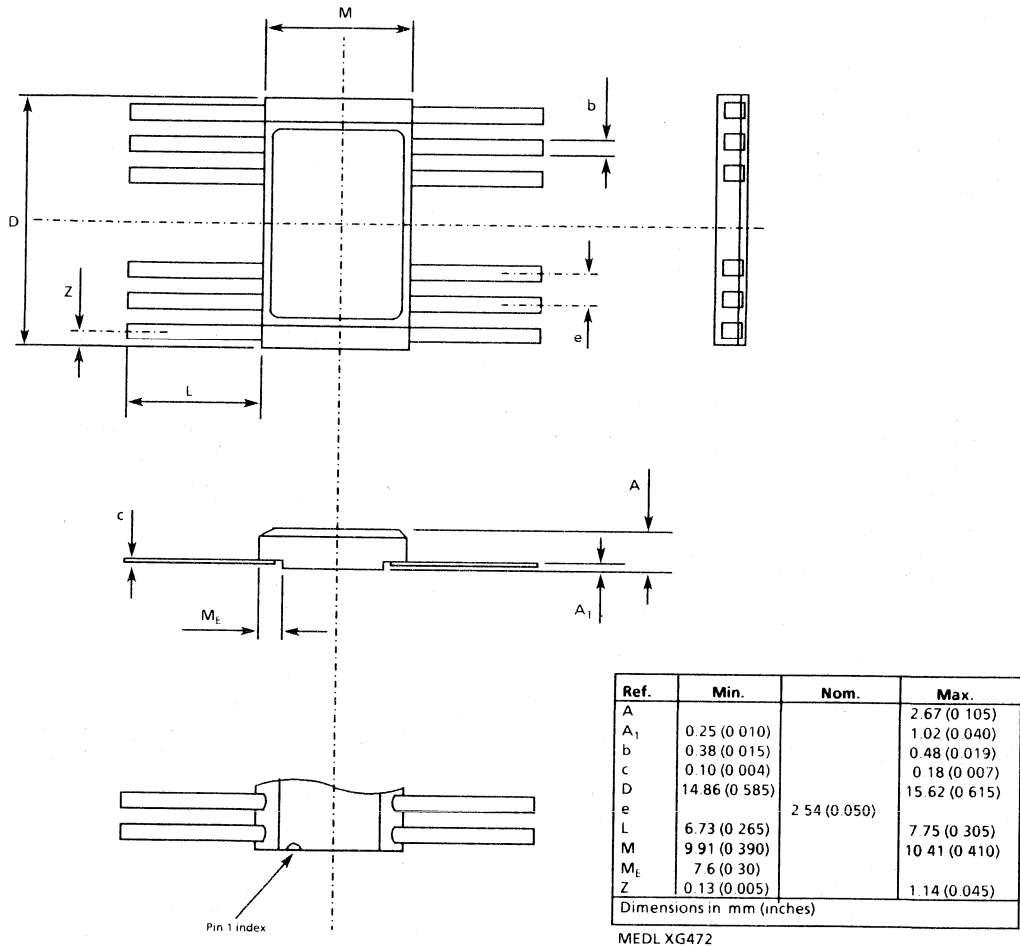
24-lead Ceramic Flatpack (solder seal) - Package style F
